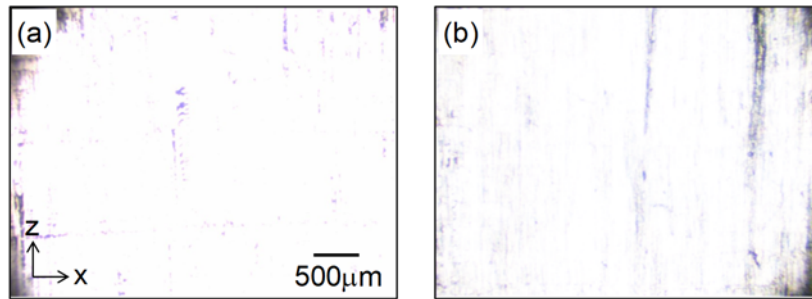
Observed images of glass die–workpiece contact interface without lubricant (surface roughness of workpiece:  $Ra = 0.16 \text{ }\mu\text{m}$ ): (a) during forging without pulsation and (b) after forging ( $s_2 = 13 \text{ mm}$ ).
